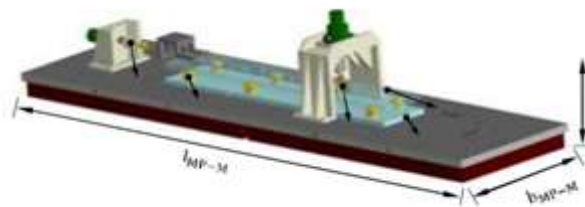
3D design of MP-M dynamometer model with transparent cover plate for the clear view of installed sensors
